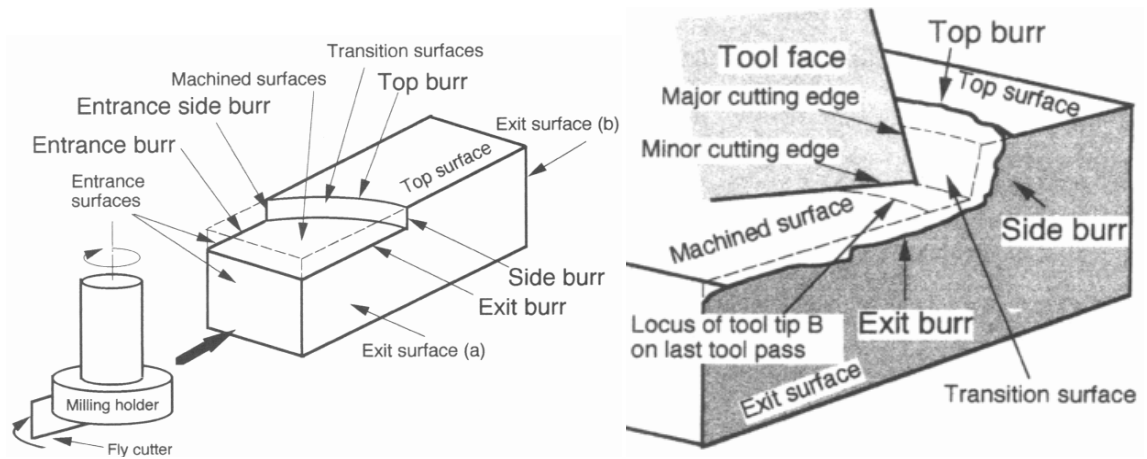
Tool motion and burr locations in face milling [Hashimura, 1999]
